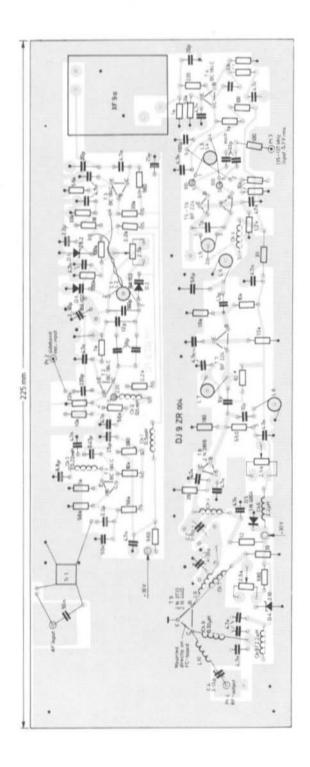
Printed circuit board DJ 9 ZR 004 with component locations
